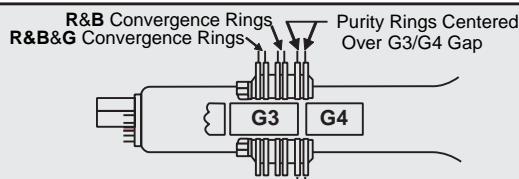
Positioning of Purity/Convergence Assembly (2-piece assembly)
